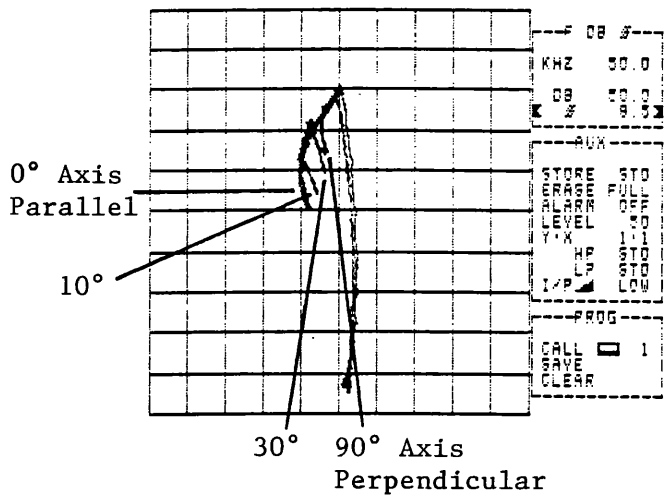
175 Turn Air-cored Horizontal Coil used to Inspect Stainless Steel Weld Specimen 1
